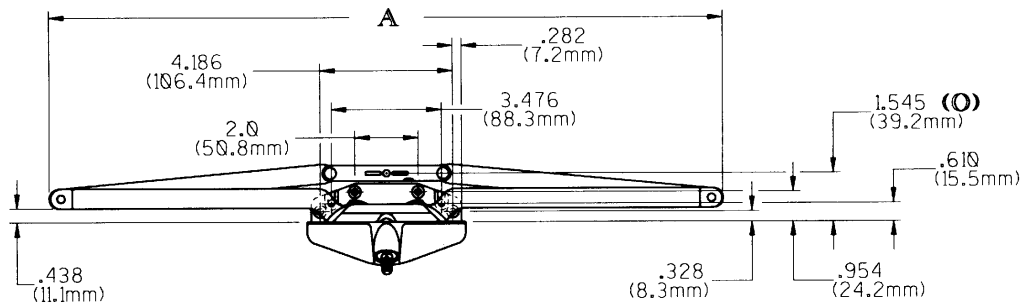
ROTO GEAR AWNING OPERATOR (SINGLE PULL)
